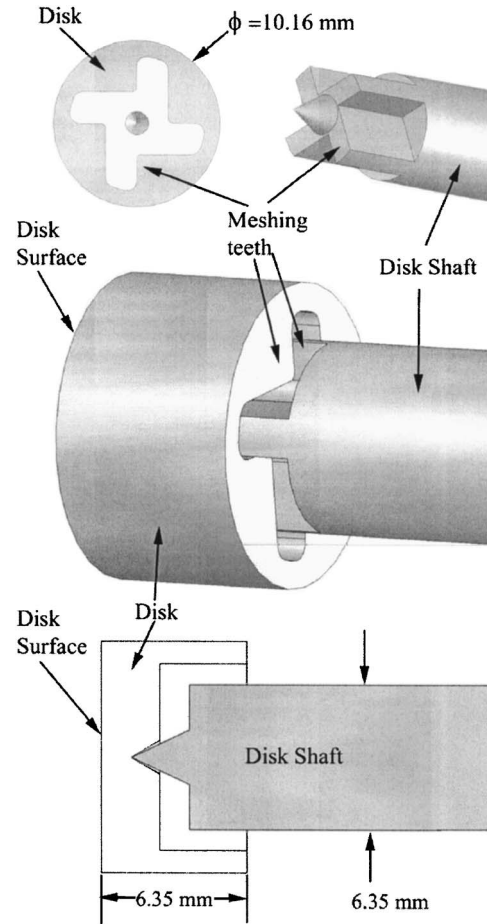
Cross-sectional view and assembled view of the disk and disk shaft
